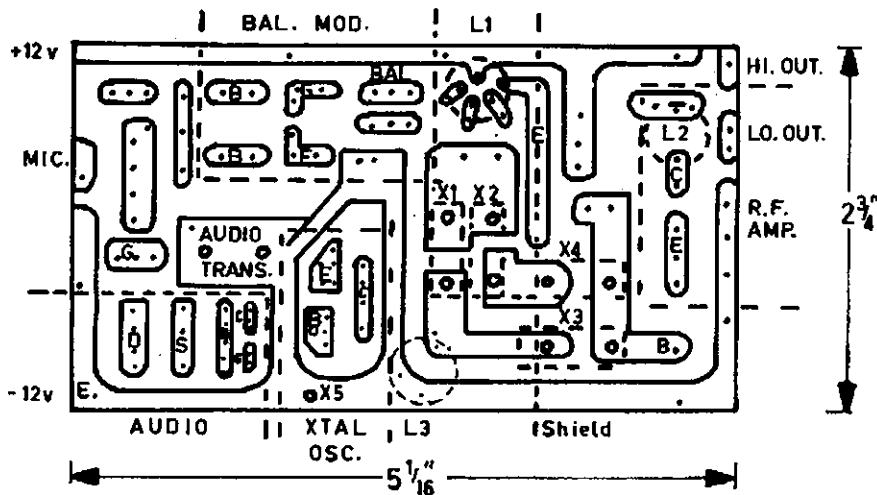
PRINTED CIRCUIT BOARD LAYOUT.
